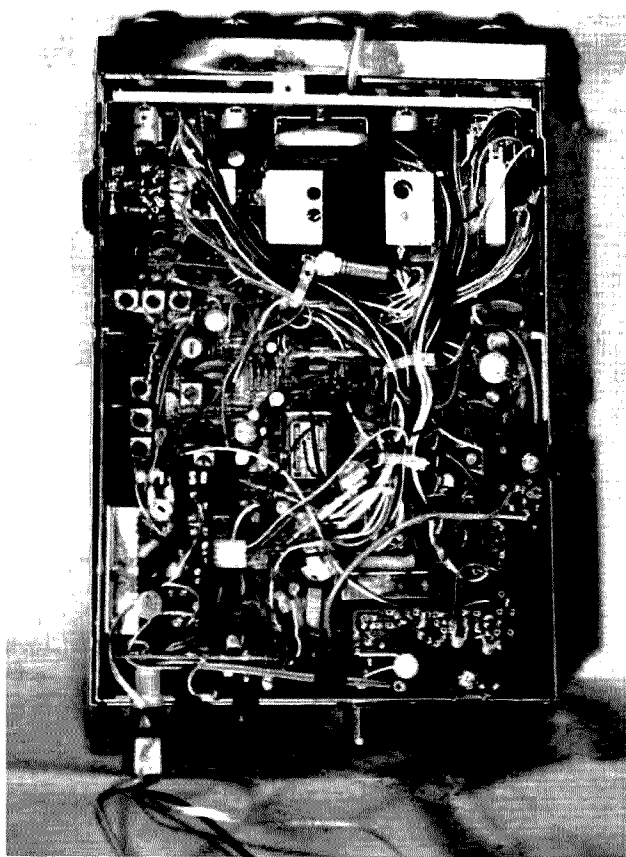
Bottom view of the Sears Roadtalker 40 showing component layout.
